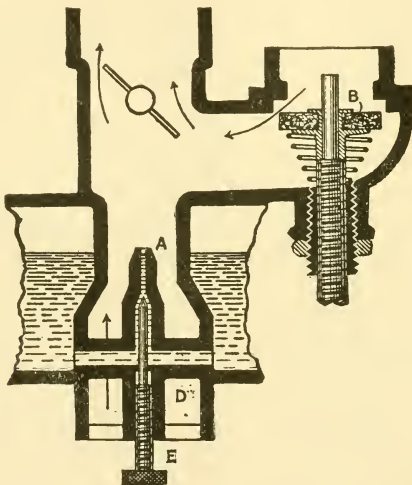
The mixing chamber with its appendages. Illustrating, in general, the arrangement of parts, the primary, and secondary or auxiliary air passages; auxiliary valve, spring and adjustment; the spray nozzle with needle valve and the throttle valve. The arrows indicate the direction of the entering air currents and course of mixture.
